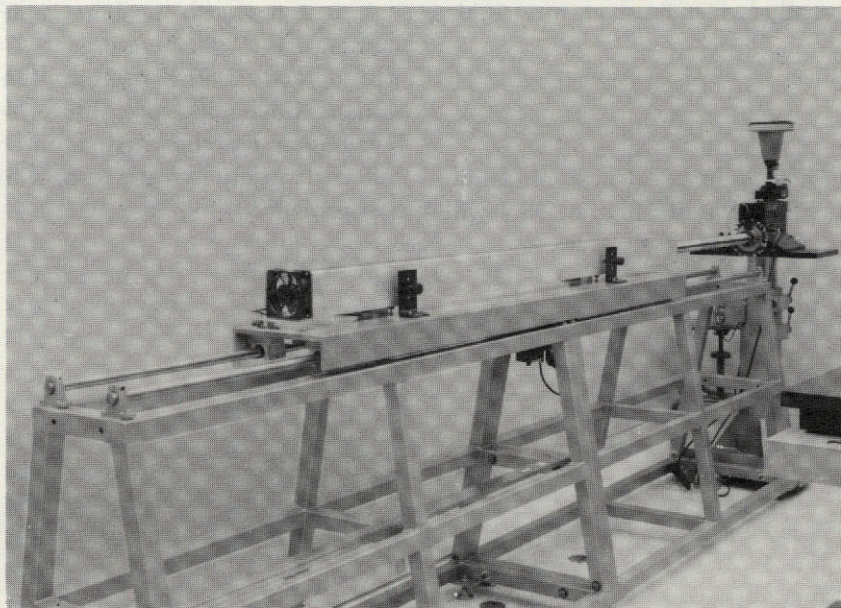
Precision borescope showing carriage, waveguide to be inspected, and control head
